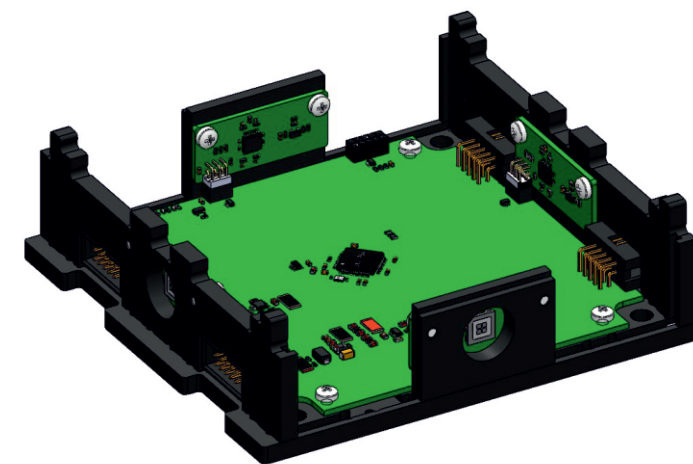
Connecting a bracket-mounted sun sensor board with the general-purpose board
